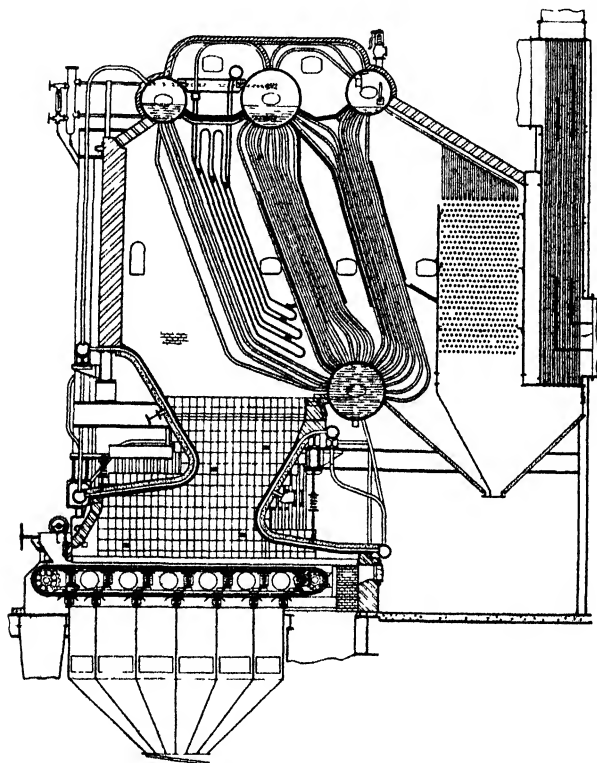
Babcock and Wilcox chain-grate stoker applied to boiler unit which includes superheater, economizer, and air heater.
